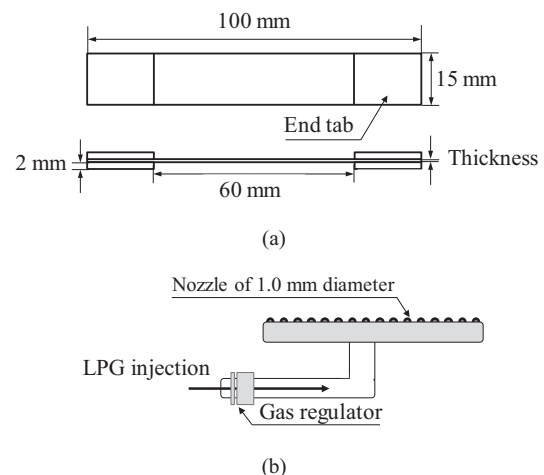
(a) Dimensions of the tensile test specimens; (b) liquefied petroleum gas burner for the fire exposure test.
